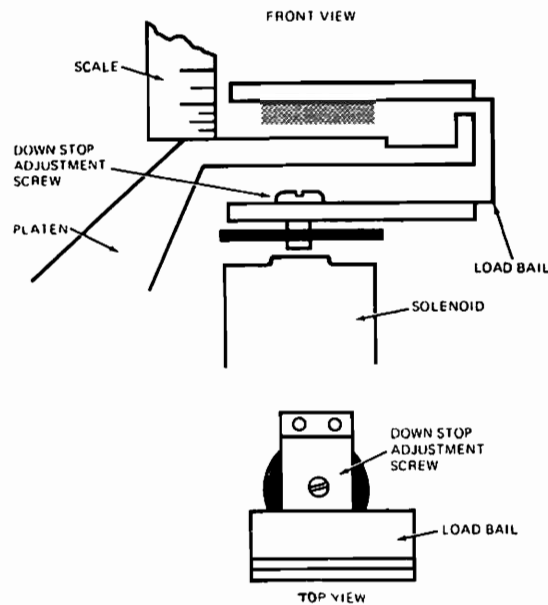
HEAD LOAD BAIL ADJUSTMENT
